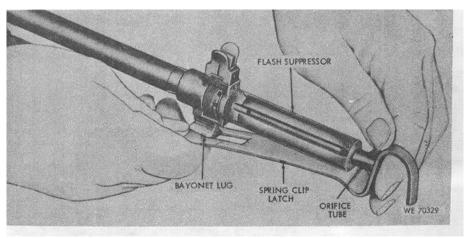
Installation/removal of blank ammunition firing attachment.
